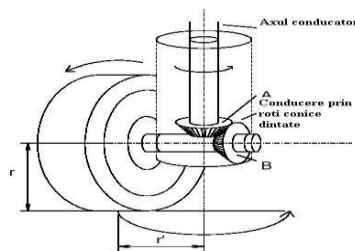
Compensate for slipping in a cornering is achieved using wheels for bevel gear transmission, to the three wheels of robot K2A Navmaster.
